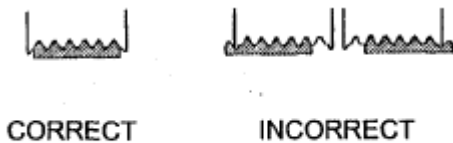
Identifying V-Ribbed Belt For Wear And Cracks
